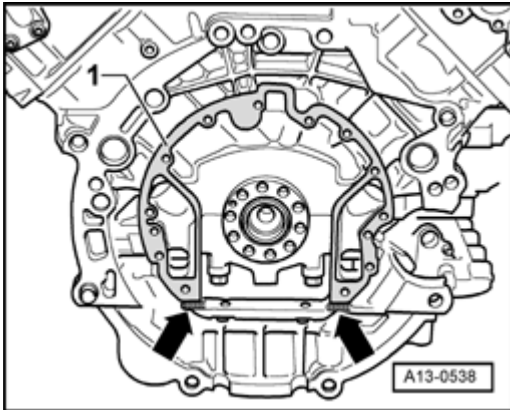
Placing New Sealing Ring Onto Cylinder Block & Applying Thin Silicone Sealing Bead
